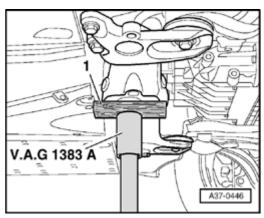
Removing VAG1359/2 Universal Mount From VAG1383A Engine/Transmission Jack And Inserting Piece Of Wood Instead
